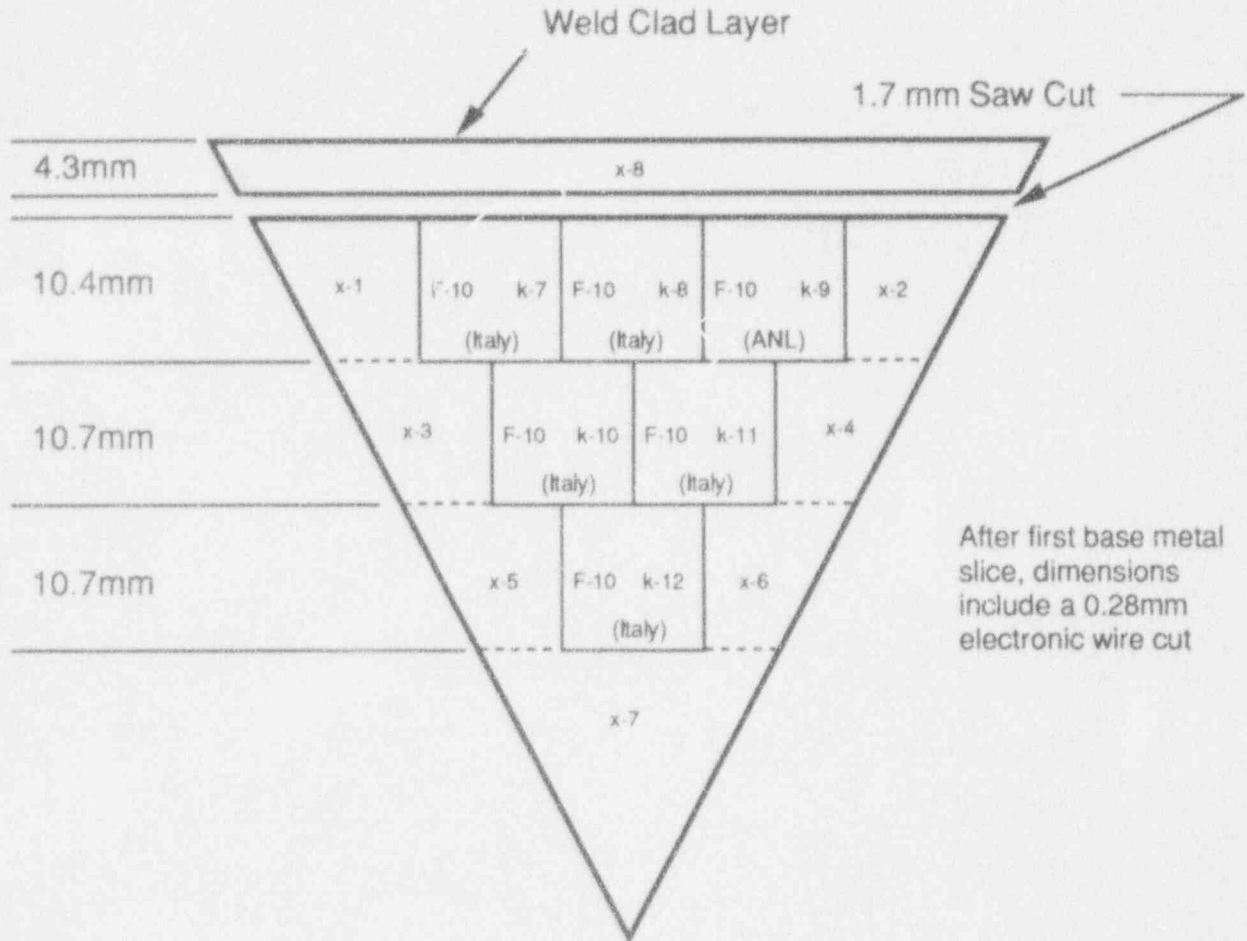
Locations of mechanical test specimens k7 through k12 cut from Sample F-10.
